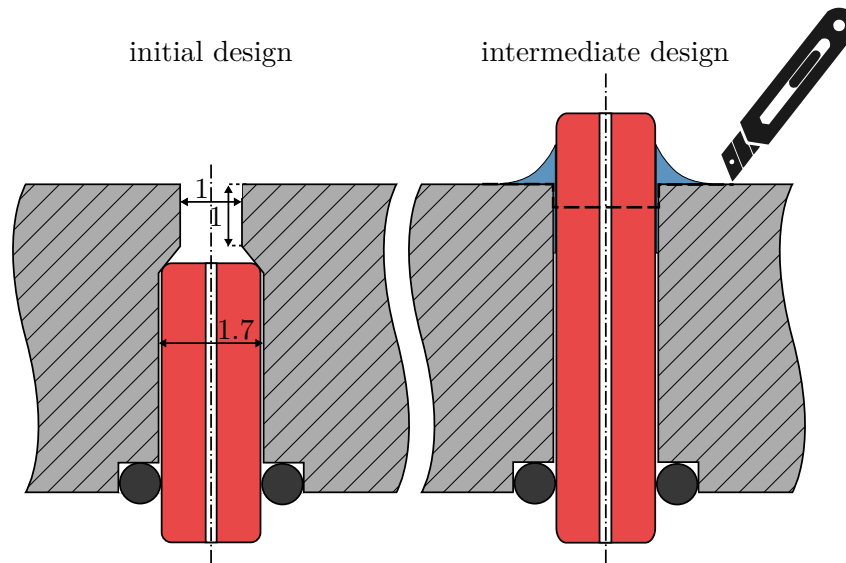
Initial and intermediate design to fix restrictor in bearing. Dimensions are in mm, the scale is 8:1. Downstream volume of initial design makes the bearing dynamically unstable. This is solved in the intermediate design, but bearing surface and restrictor are damaged by the cutting.
